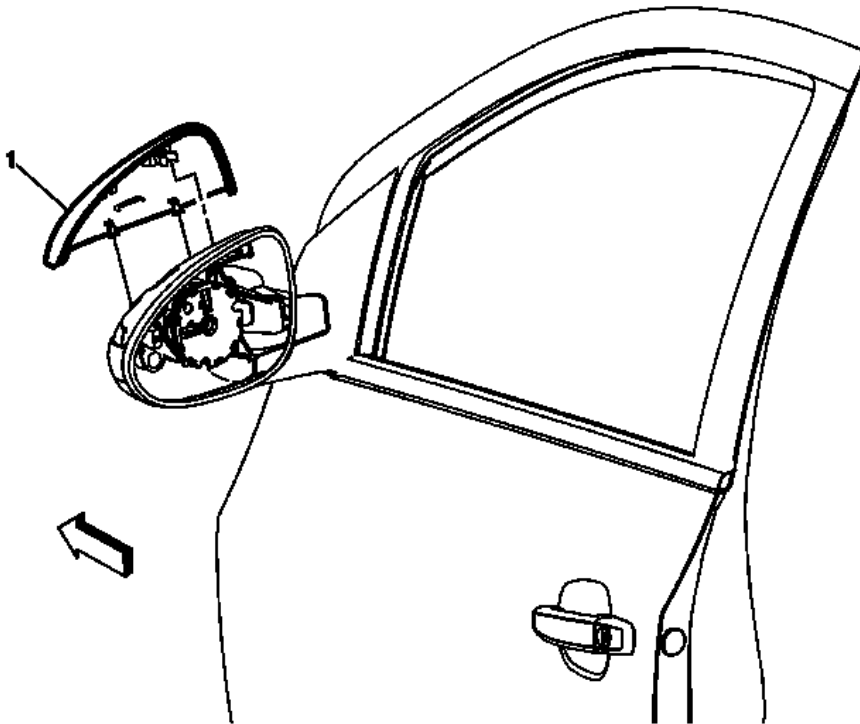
Outside Rearview Mirror Housing Rear Cover
